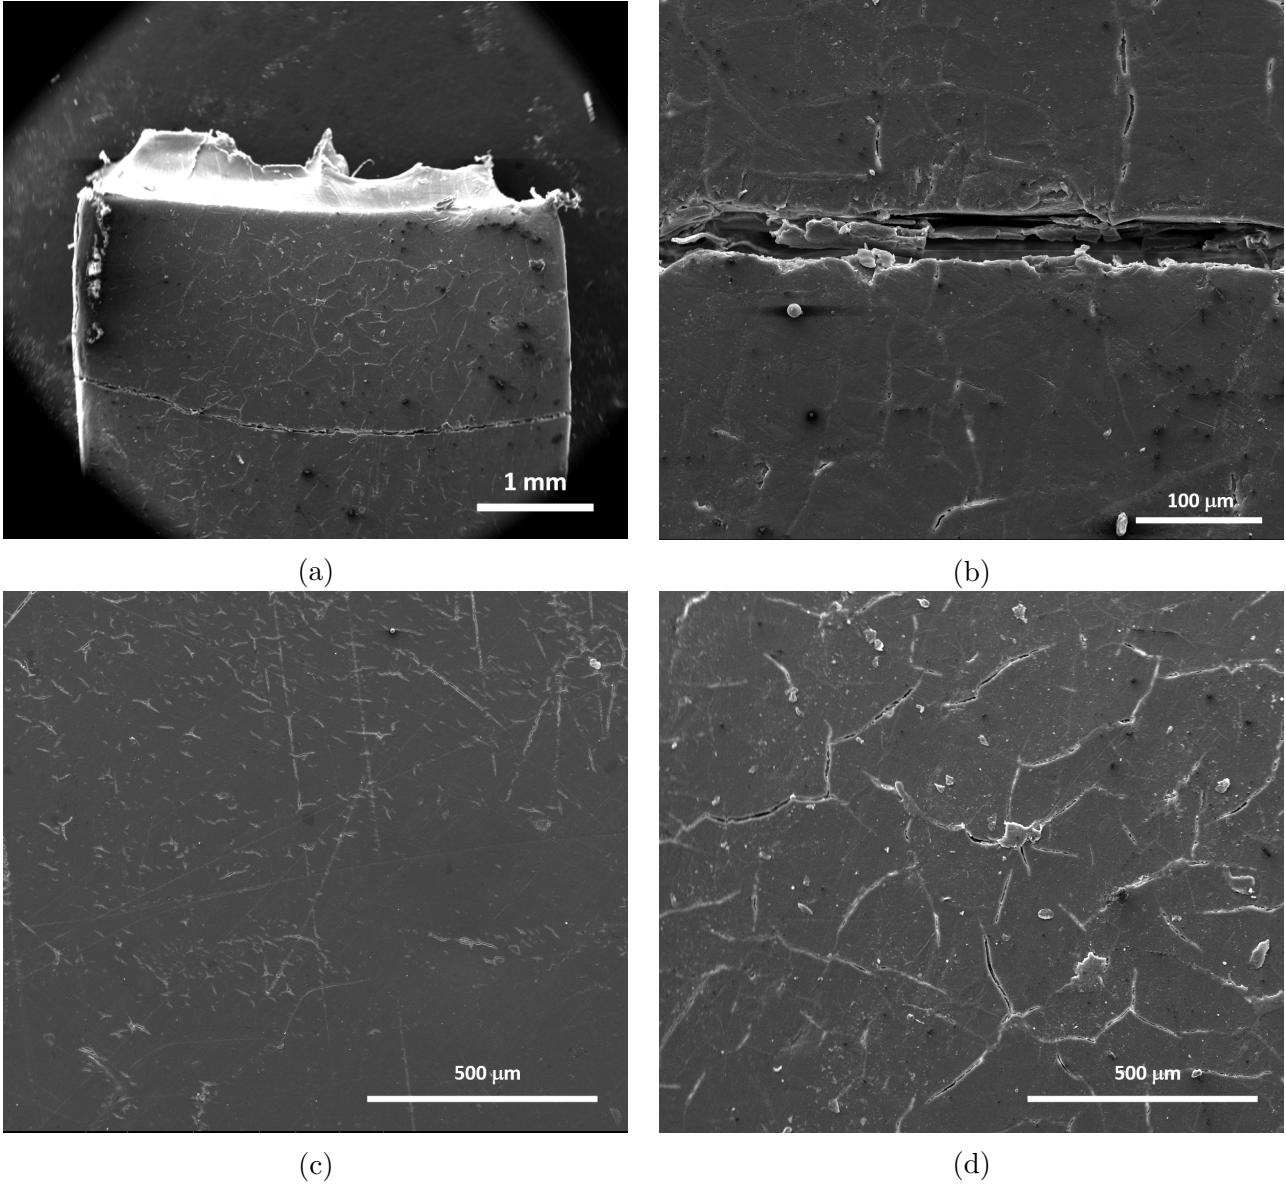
Fractography of 192 h UV-aged LDPE plate. (a) Fracture mode of LDPE plate after 192 h of HUV aging, and; (b) Detail of percolating crack. (c) Microcracks formed post-aging in absence of external loads. (d) Crack network formed after fracture.
